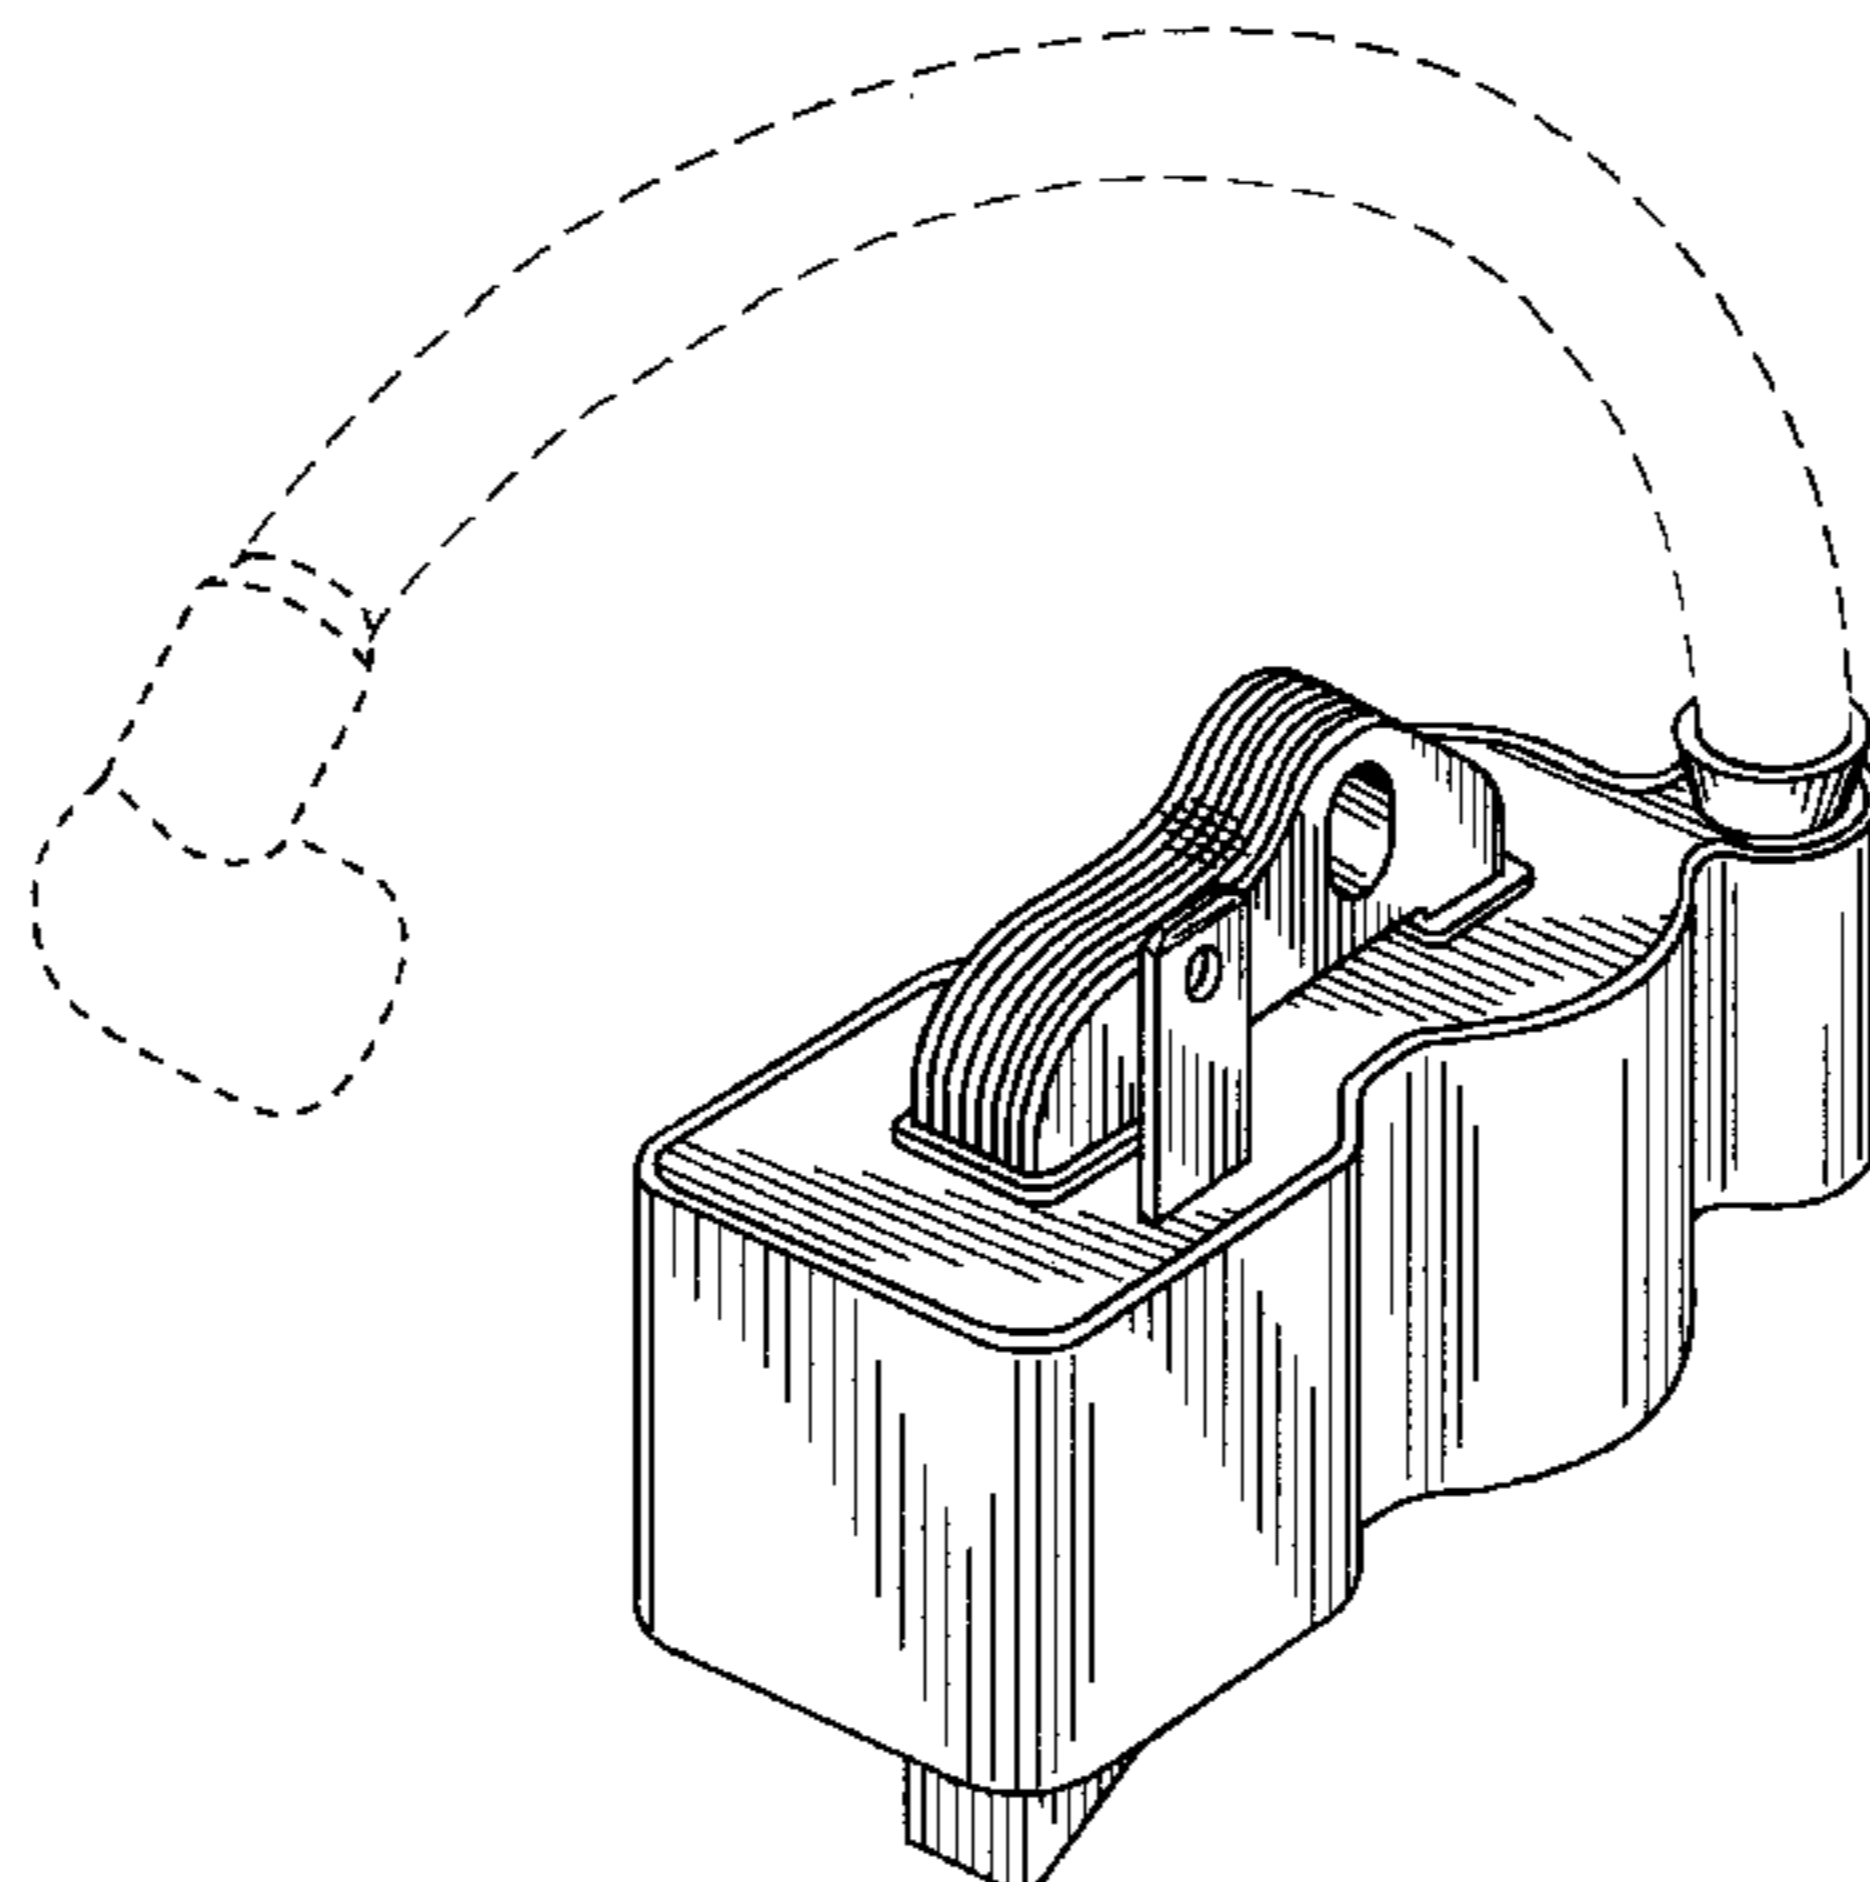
is a perspective view of an ignition module for small gasoline engine showing my new design;
